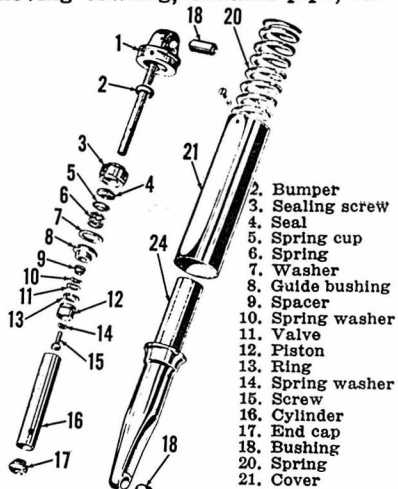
Exploded view of rear suspension unit typical of Sport 60, Saber and Cheyenne.
